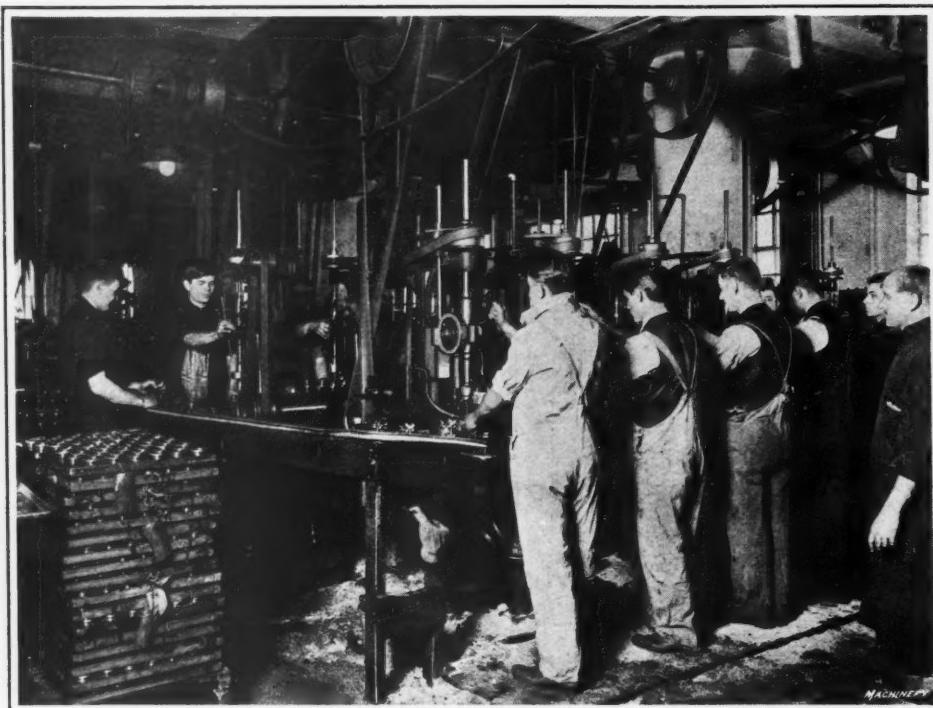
Battery of Two Four-spindle Washburn Drilling Machines operated by "Team" of Ten Men for drilling and tapping Two Holes in Fuse Parts
